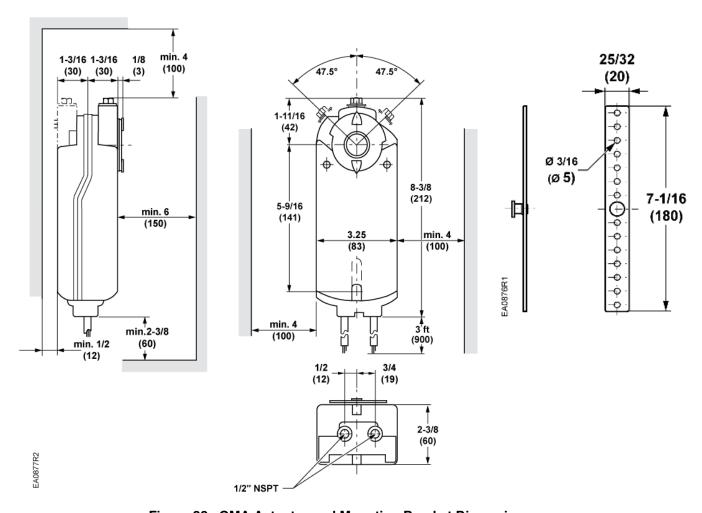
GMA Actuator and Mounting Bracket Dimensions.
